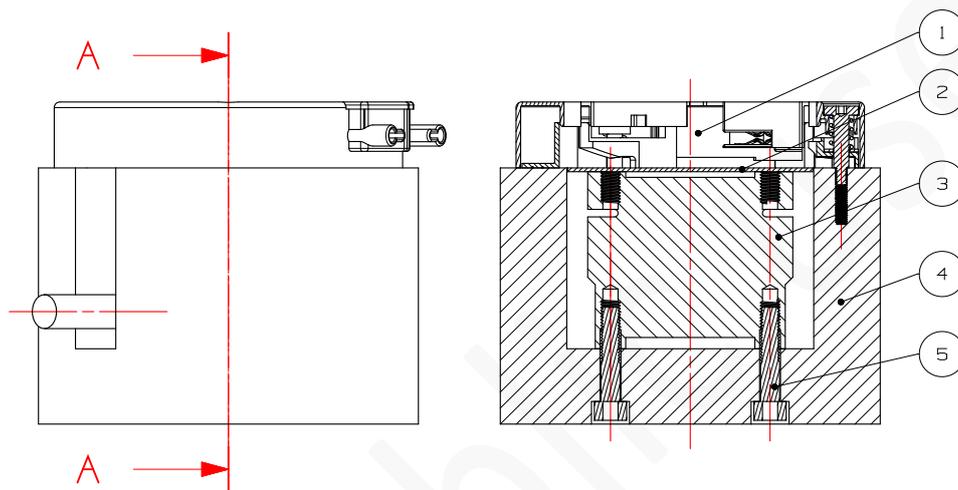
Assembly of mounting platform, force transducer and Holder under test
